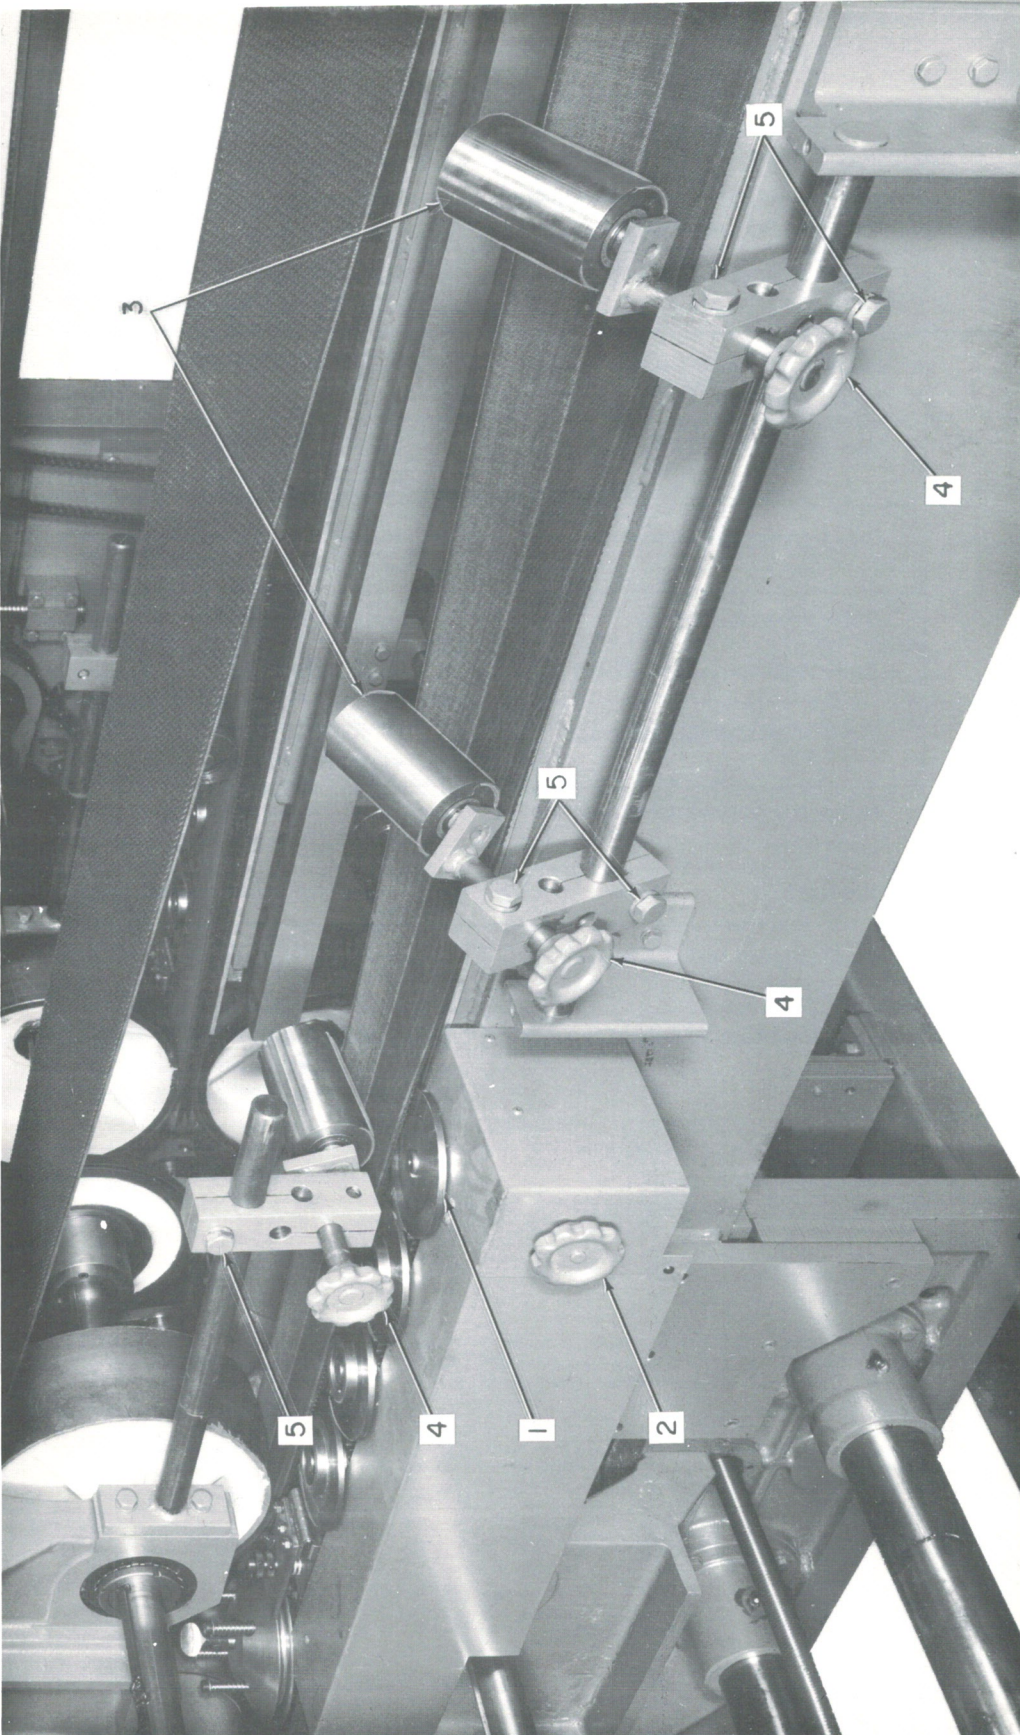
FOLDING BELT CALIPER ADJUSTMENT HANDLE
